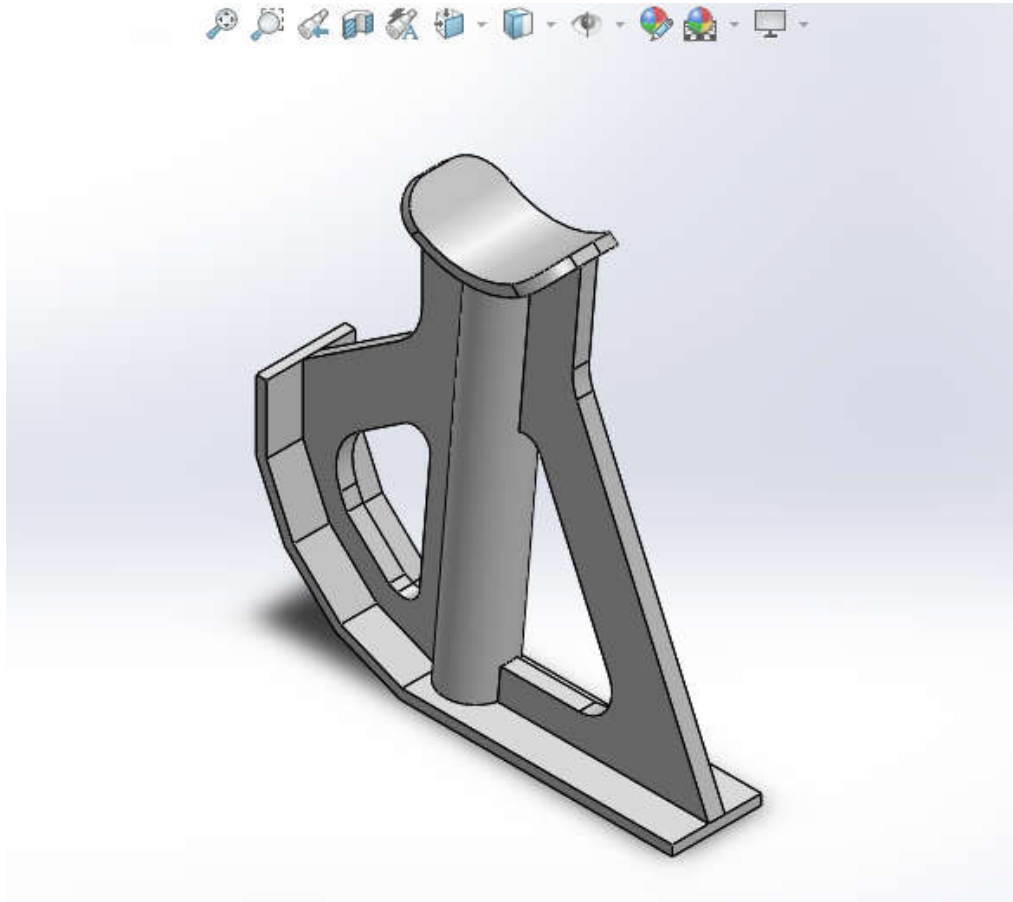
Final design of the TrestleJack for 4 wheel drive SUVs (isometric view)
